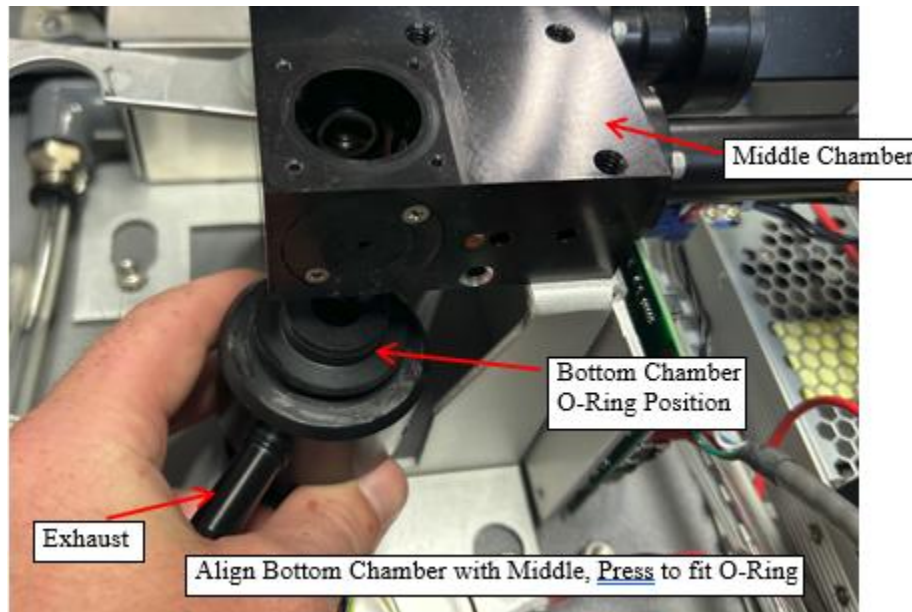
Connecting Bottom Chamber to Middle Chamber
